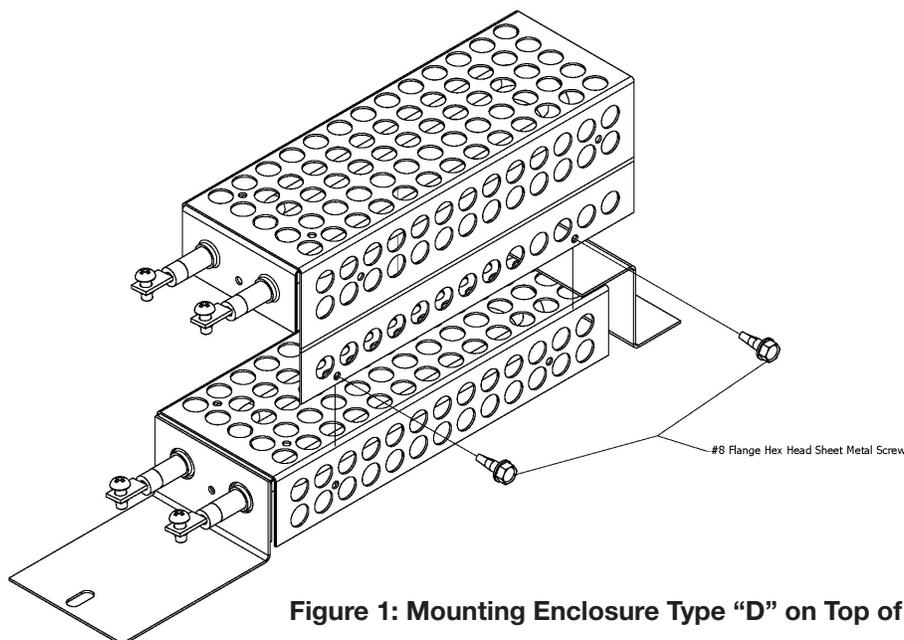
Mounting Enclosure Type "D" on Top of Other Enclosures
